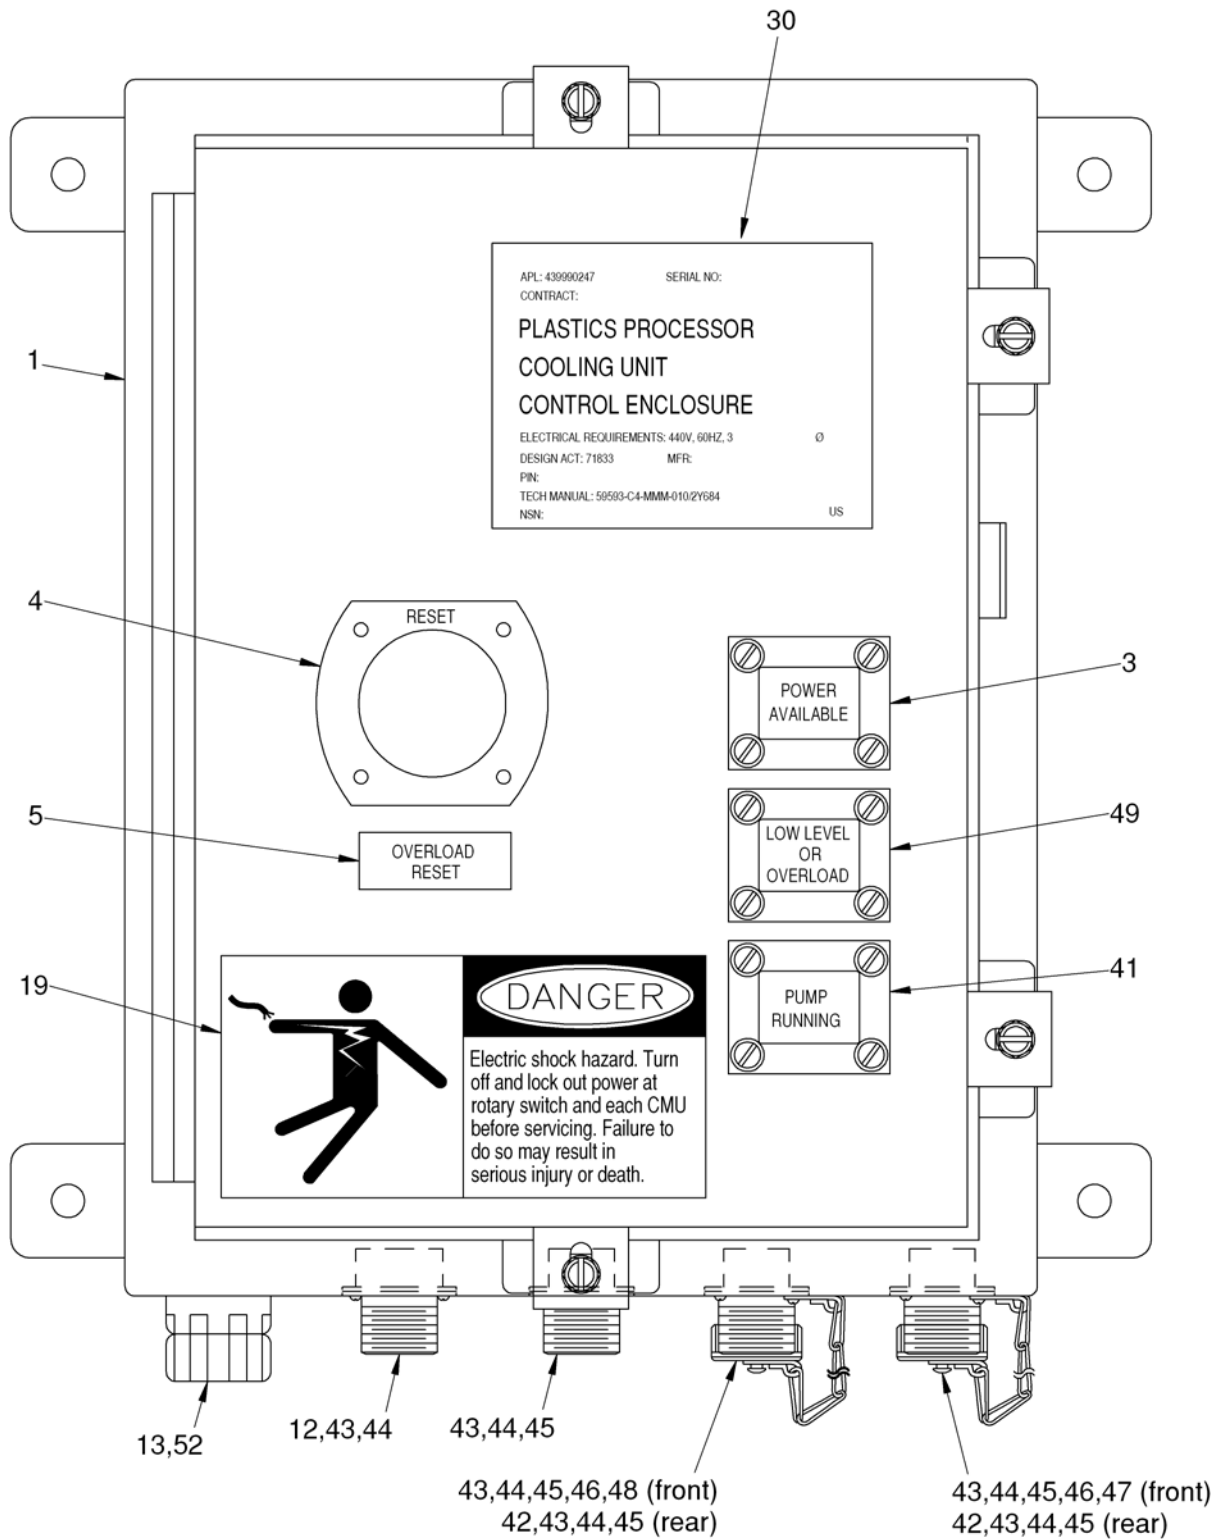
Cooling Unit Electrical Controller Assembly (sheet 1 of 2)
